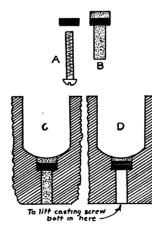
A—the bolt and nut; B—the nut with plasticine cores; C—the jack assembly cast into the mold; D plasticine cores removed, pressure plate added above nut, and plasticine filling added above pressure plate; mold ready to pour casting.
